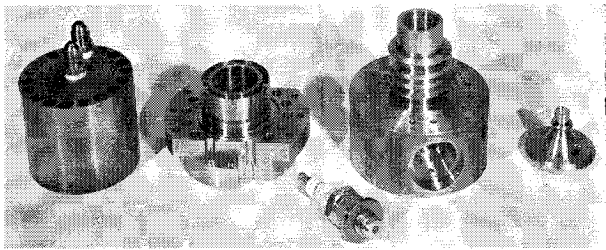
Water-cooled igniter used in conical-injector main chamber.
